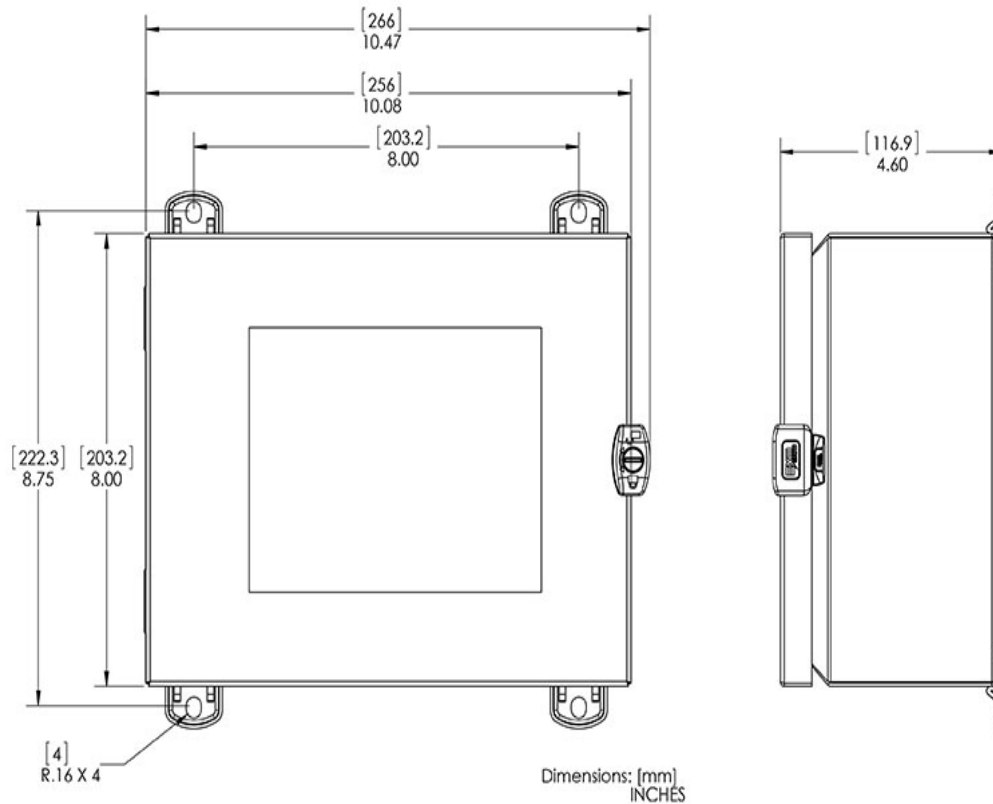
SMI 2 Enclosure: Mounting Dimensions
